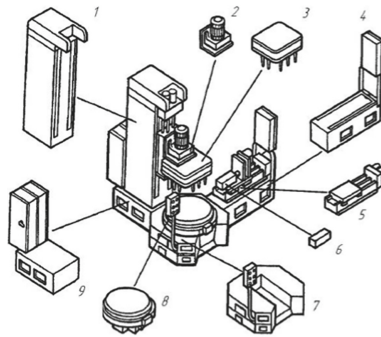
Elements of modular machine tool [7]: 1 – column base; 2 – power headstock; 3 – multi-spindle head; 4 – wing base; 5 – feed table; 6 – single spindle boring head; 7 – center base; 8 – rotary dividing table; 9 – support base.
